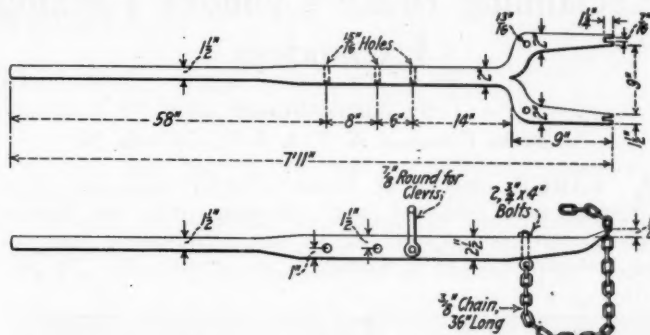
Device for Removing or Applying Heavy Locomotive Springs
